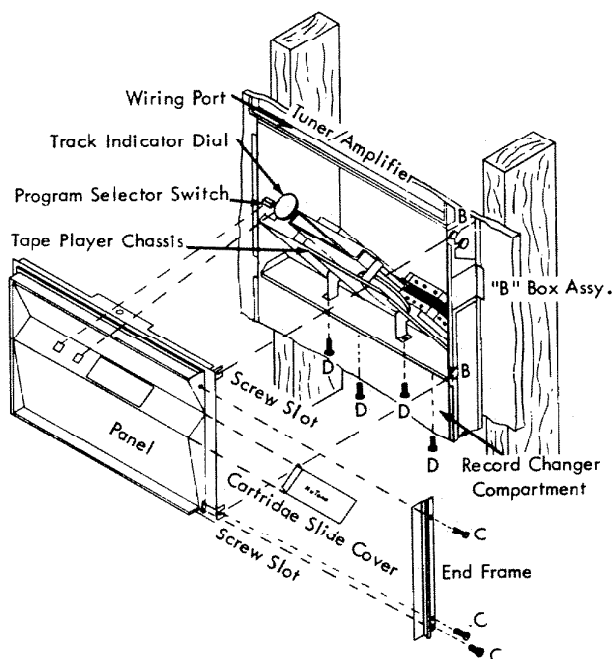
8-TRACK TAPE PLAYER ASSEMBLY
